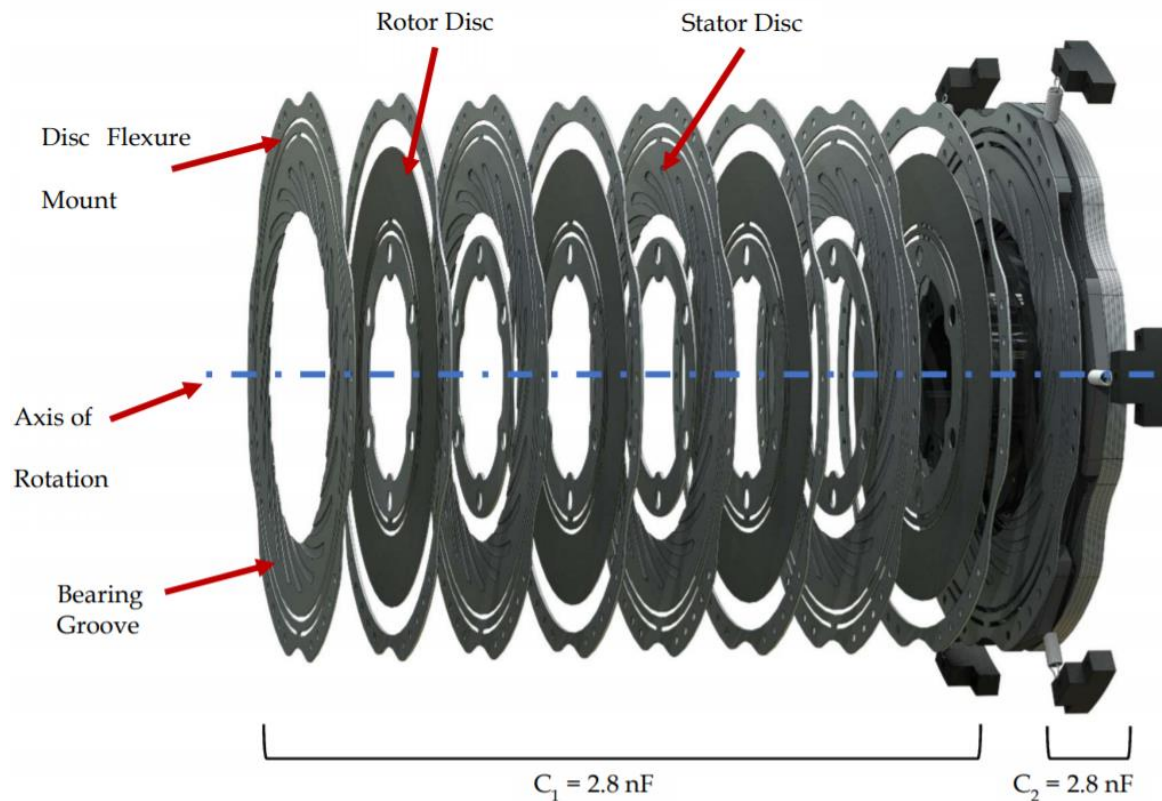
Exploded view of aerodynamically levitated cascaded disk CPC from [63].
